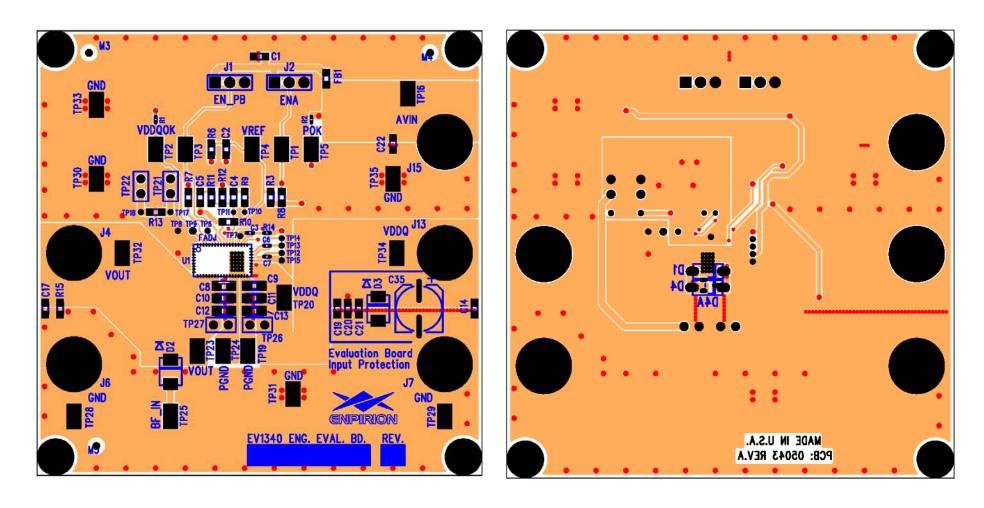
Evaluation Board Top Side and Bottom Side (viewed from the top) Assembly Layers.
